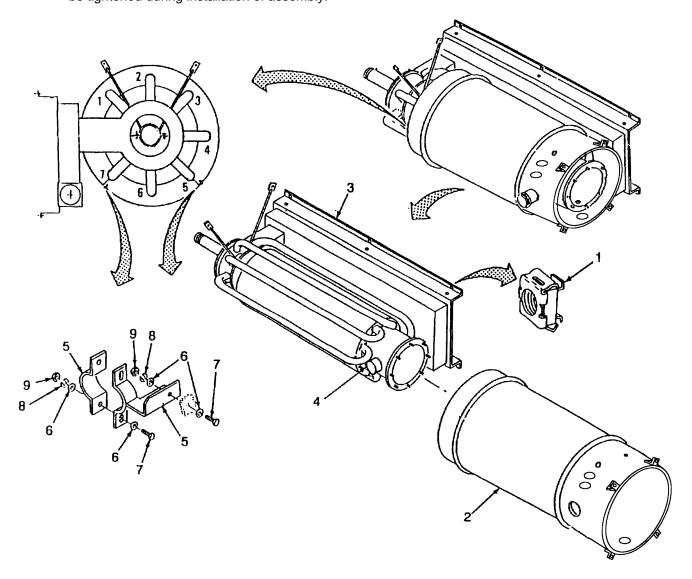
Heat Exchanger, (Model H120-1) Assembly
